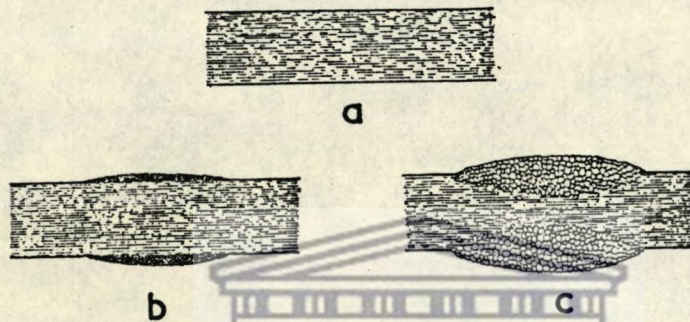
Effect of soldering time. (a) Fibrous wire structure. (b) Solder applied quickly. (c) Soldering time too long.
